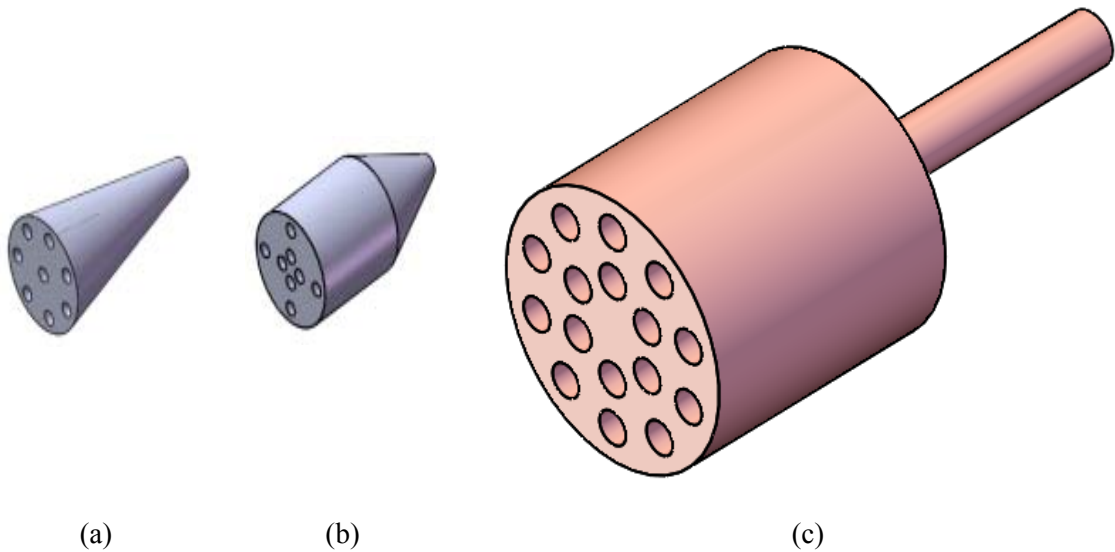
(a) Initial heater design, (b) Modified heater design, and (c) Final heater design
